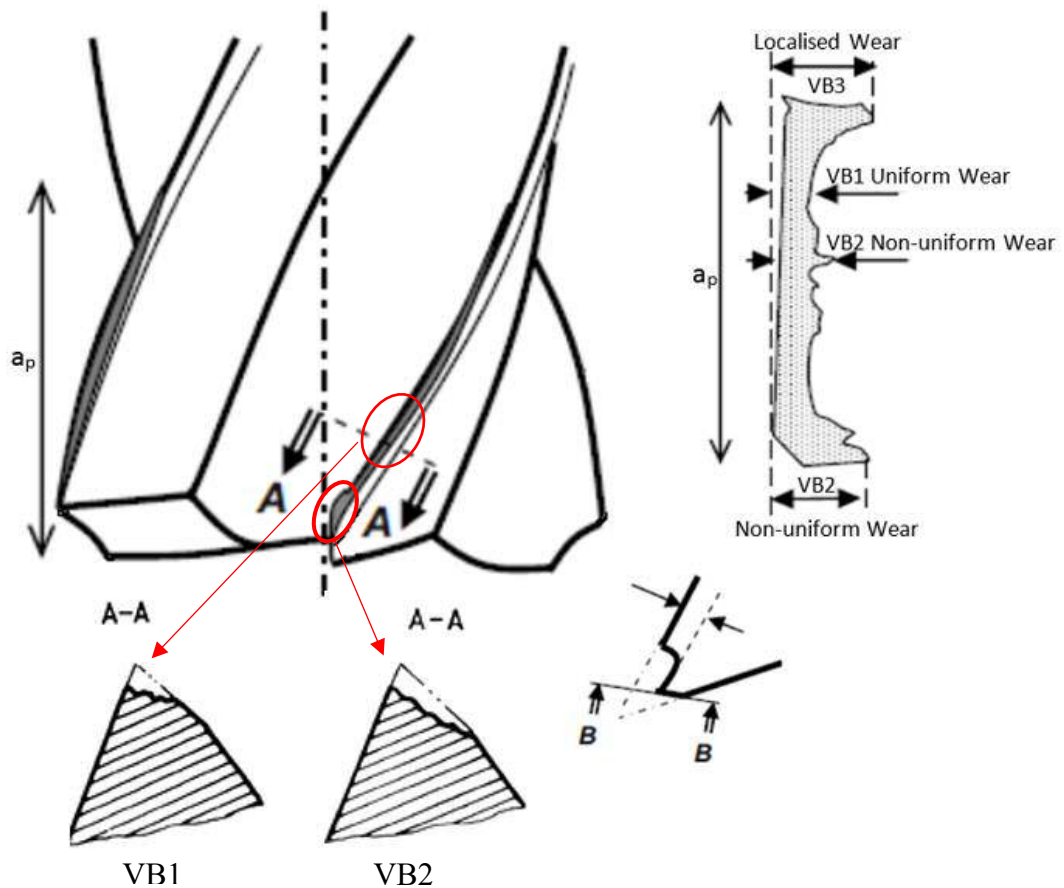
The wear in end milling cutter (ISO8688-2 2016)
